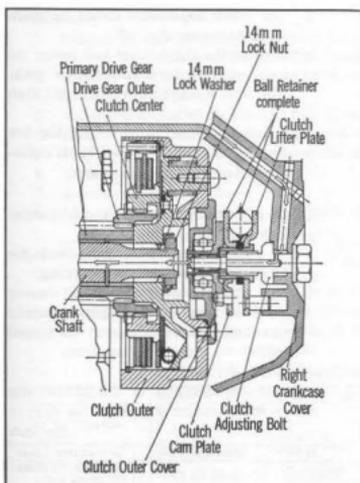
ST 50-70-CT 70 CT 70, K1, K2, K3 Clutch assembly
